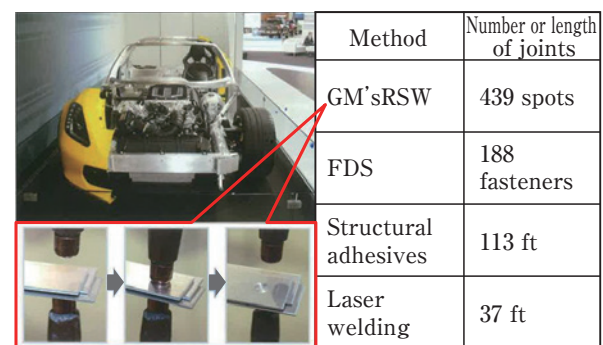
Welding and joining technologies for fabricating CORVETTE.
